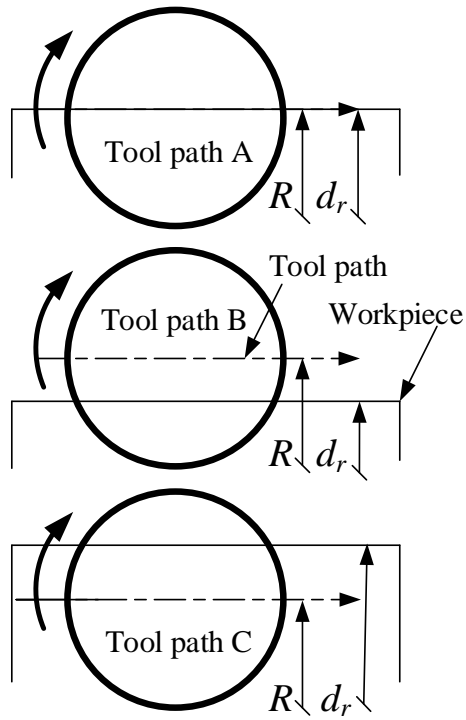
Three types of tool paths in down milling²⁶⁾.
